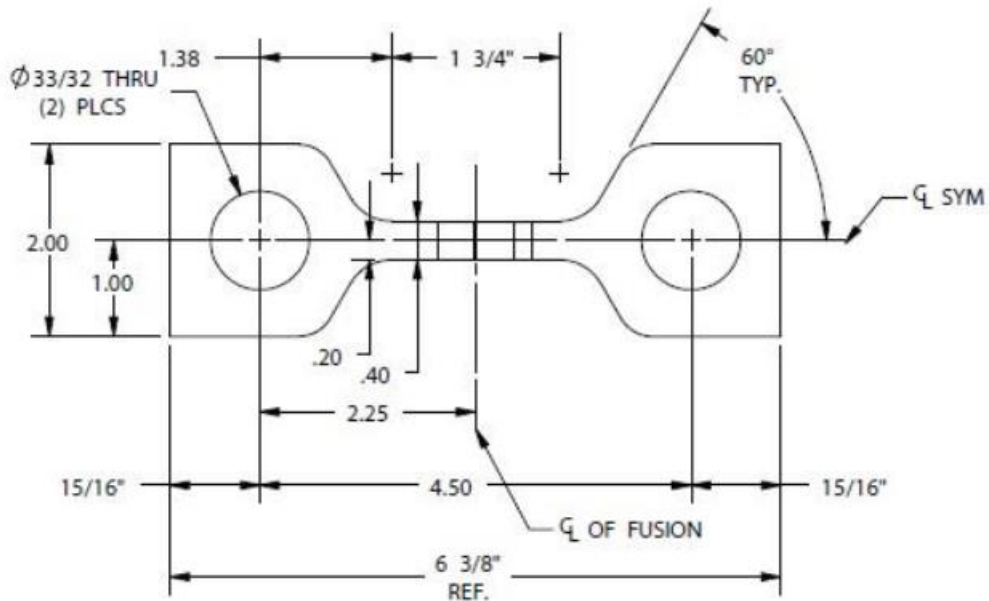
, Tensile impact test specimen (all dimensions are in inches) (ASTM F2634)
